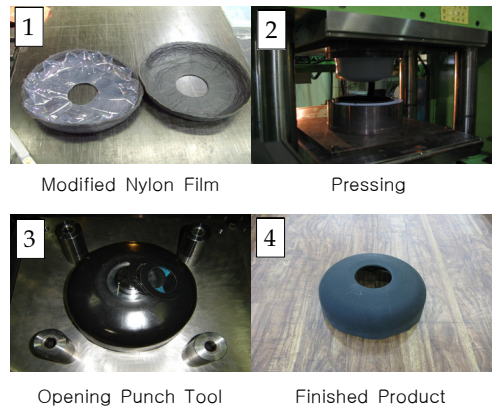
Schematic Process of Font Insulator Tube Manufacturing
